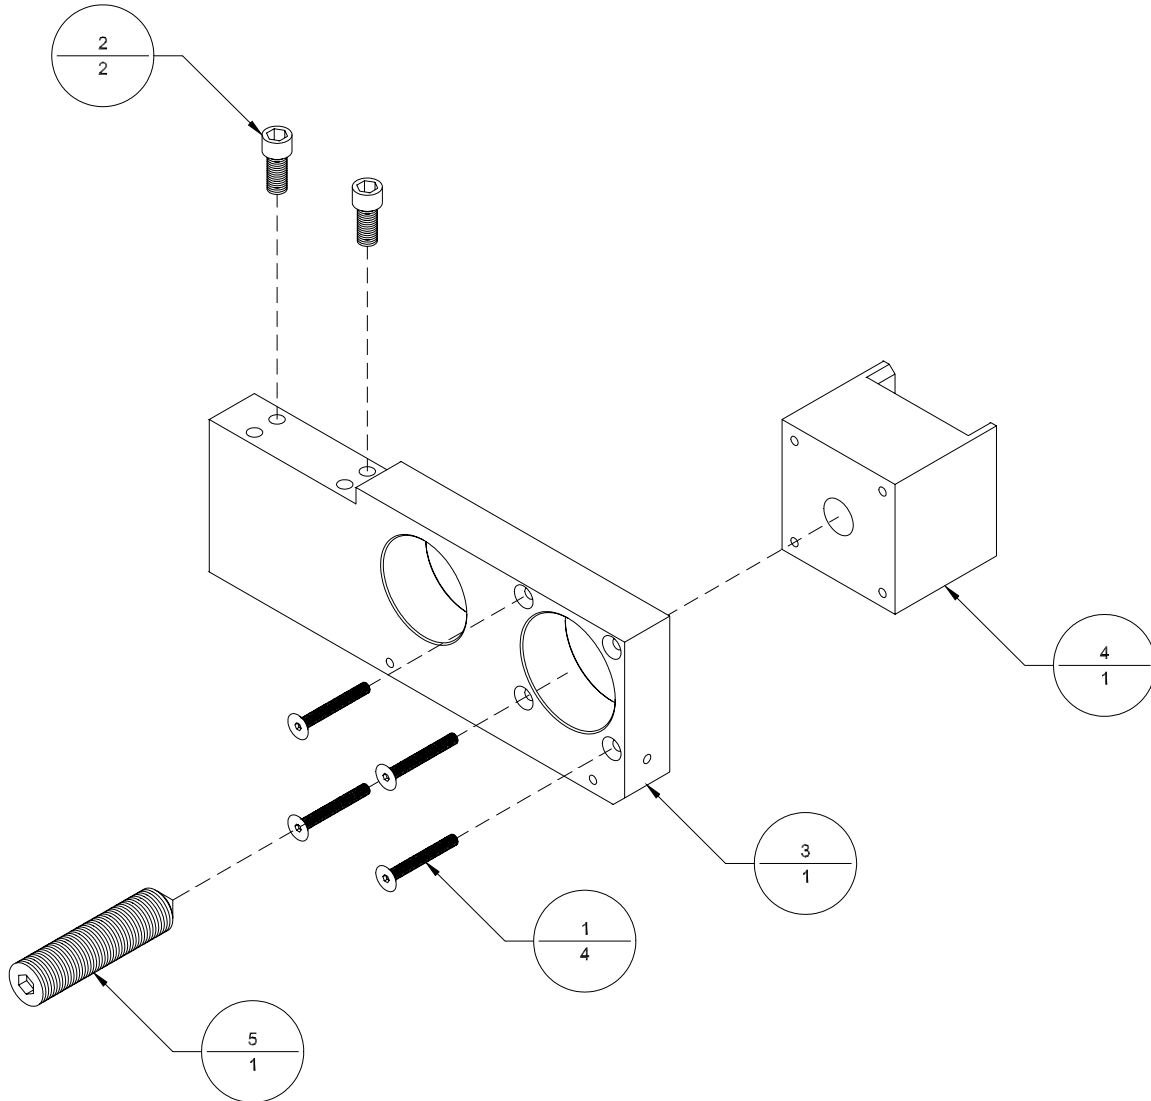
Power Take Off Locking Mechanism (9100760A)
